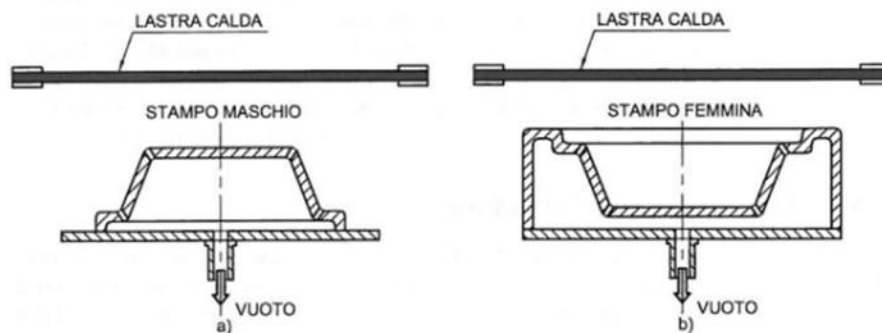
Vacuum forming: a) Male mold and b) Female mold [126].
